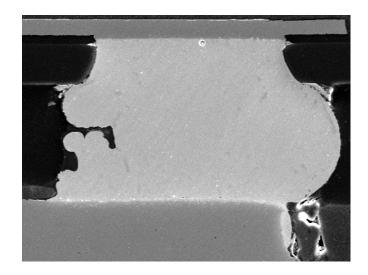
Underfill Touching Solder Paste, Causing a Bad Solder Joint Shape
